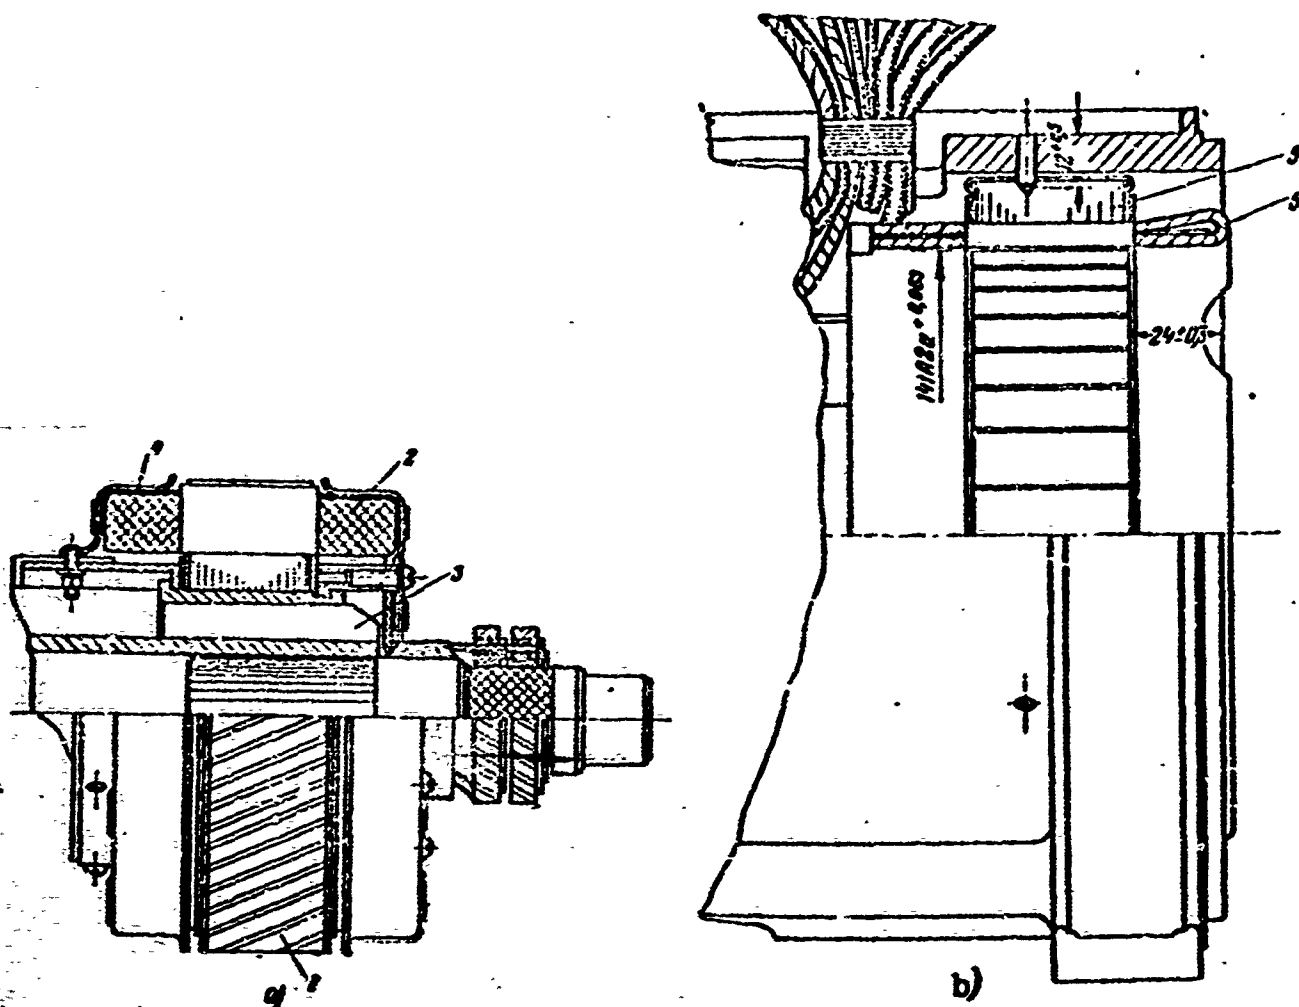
Rotor and stator for three-phase nonsalient-pole aircraft generator, 5.5 kva power. a) Rotor; b) stator. 1) Rotor force; 2) bands; 3) rotor bushing; 4) field winding; 5) armature core; 6) armature winding.
